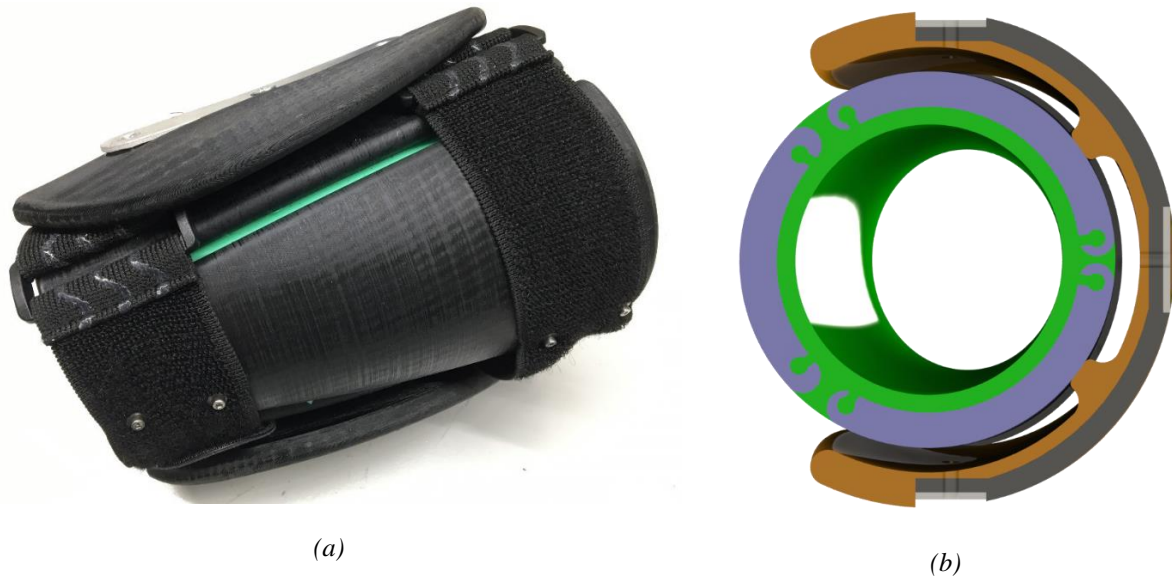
Assembly of sleeve complex of iteration 3 (a) Real assembly of sleeve complex (b) a cross-section of the virtual assembly of the sleeve complex of iteration 3
